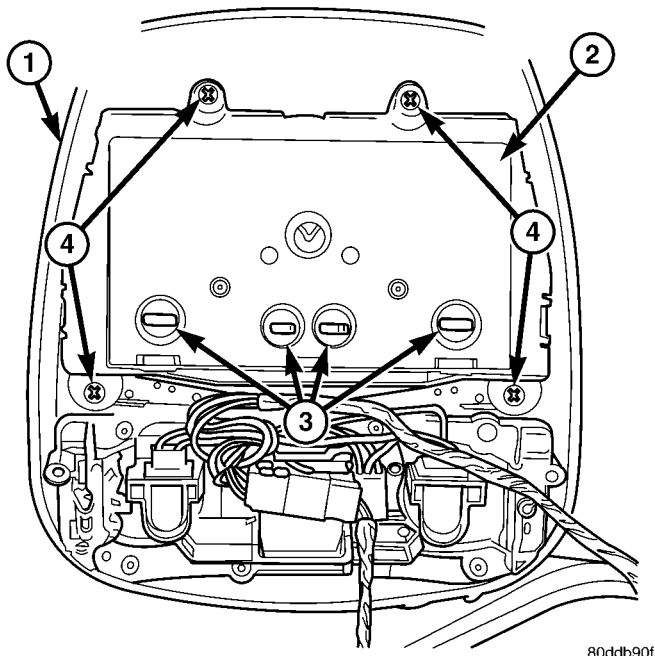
ELECTRONIC VEHICLE INFORMATION CENTER REMOVE/INSTALL
